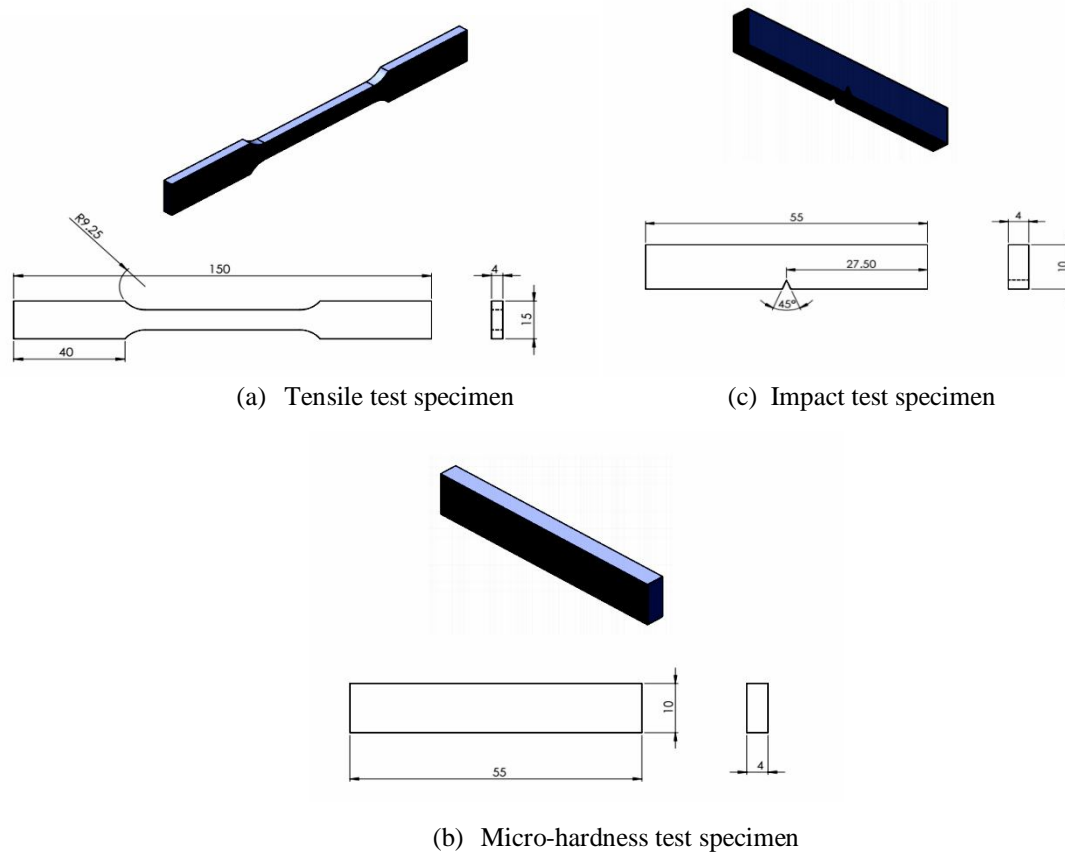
Dimensions of Mechanical and Metallurgical Test Specimens
